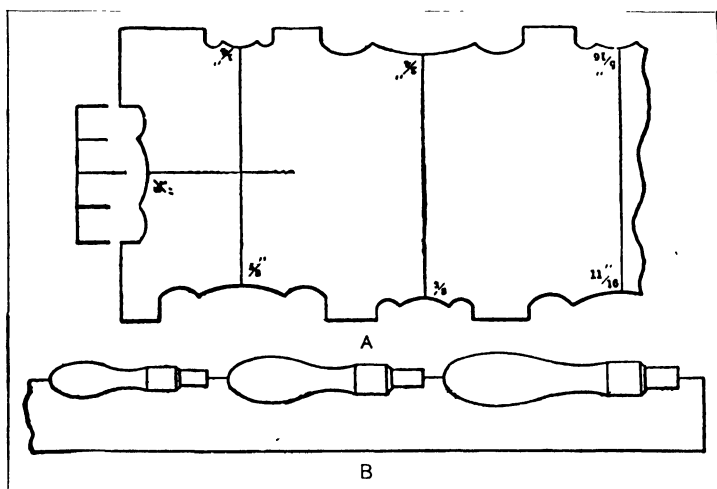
Celluloid Templates for drawing Bolt-heads and Machine Handles
